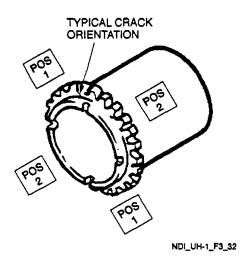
Tail Rotor Driveshaft Inner (Spherical) Coupling
